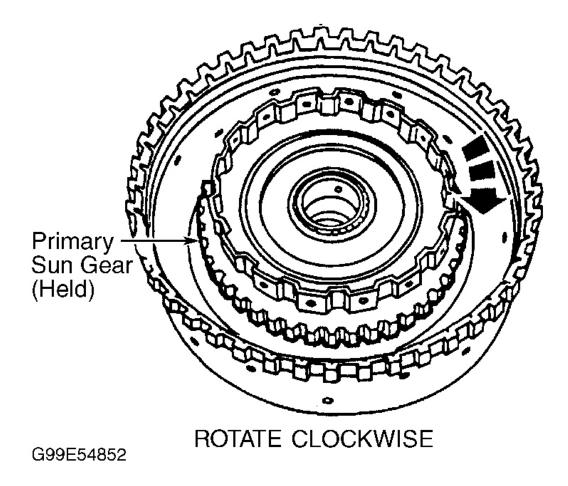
One-Way (Sprag) Clutch Rotation (Assembled View) Courtesy of FORD MOTOR CO.
